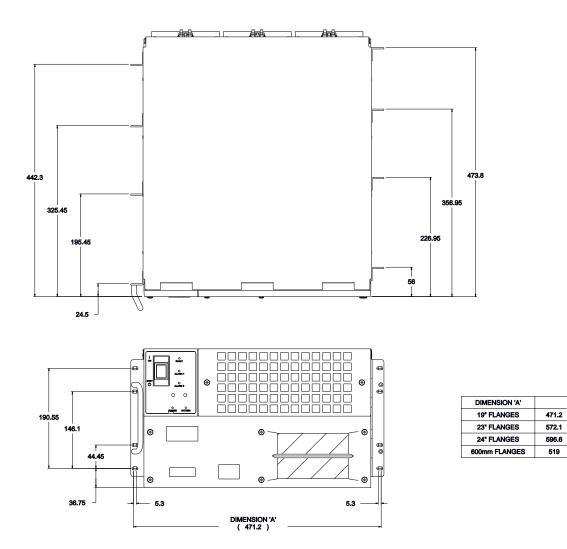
Netra t 1400/1405 Flange Options and Dimensions
